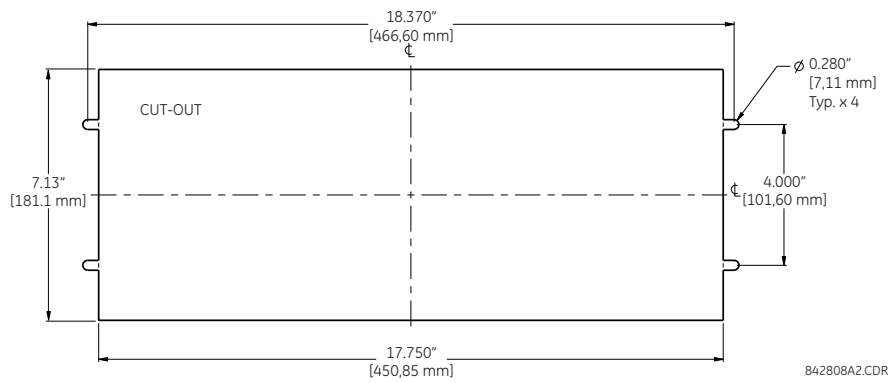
Horizontal dimensions and mounting (basic front panel)
